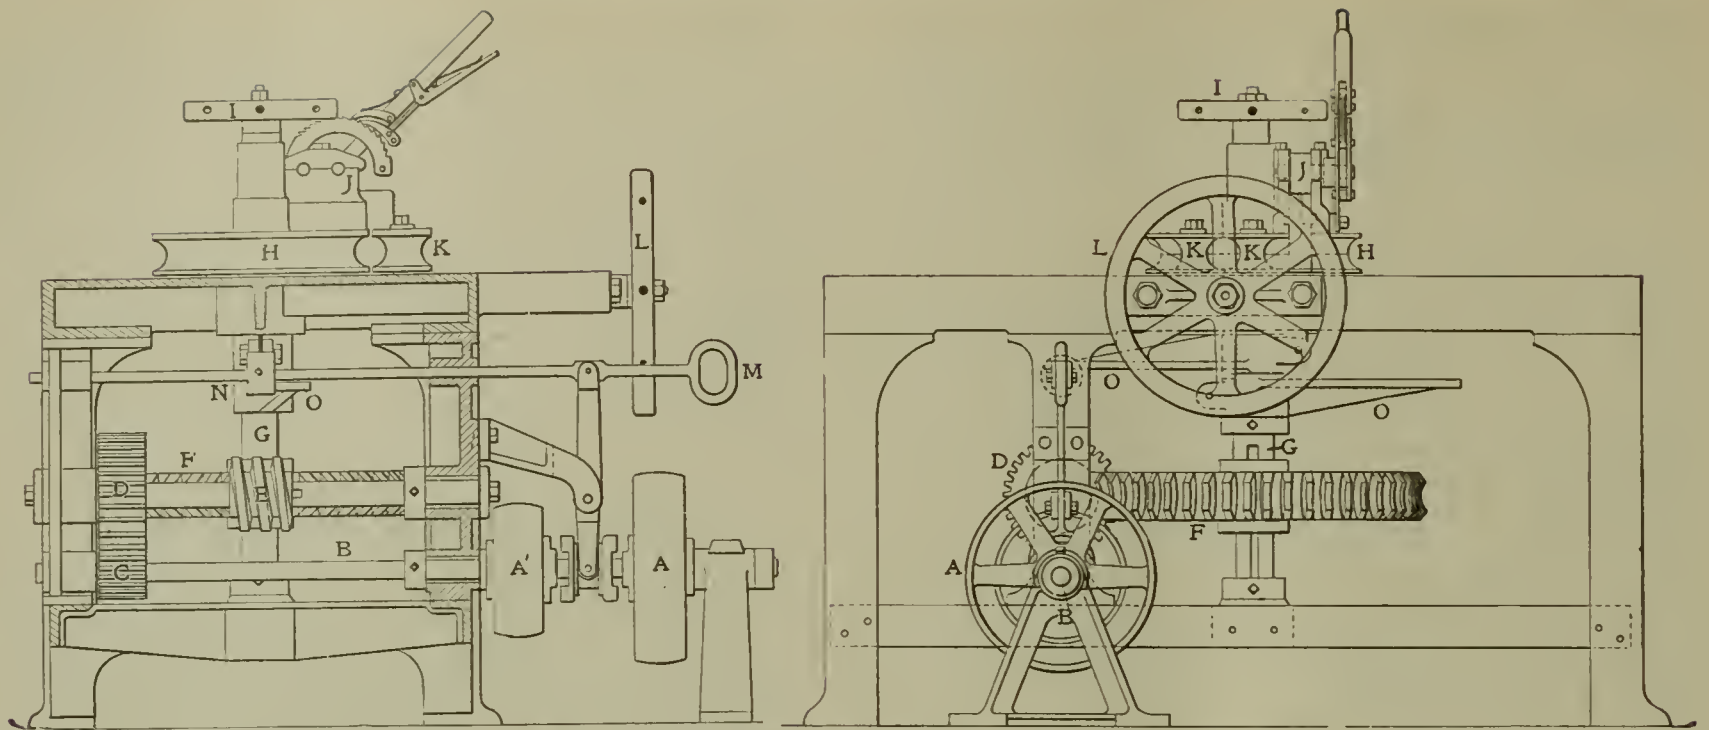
AND 3—CROSS-SECTION AND SIDE ELEVATION OF PIPE BENDER.
